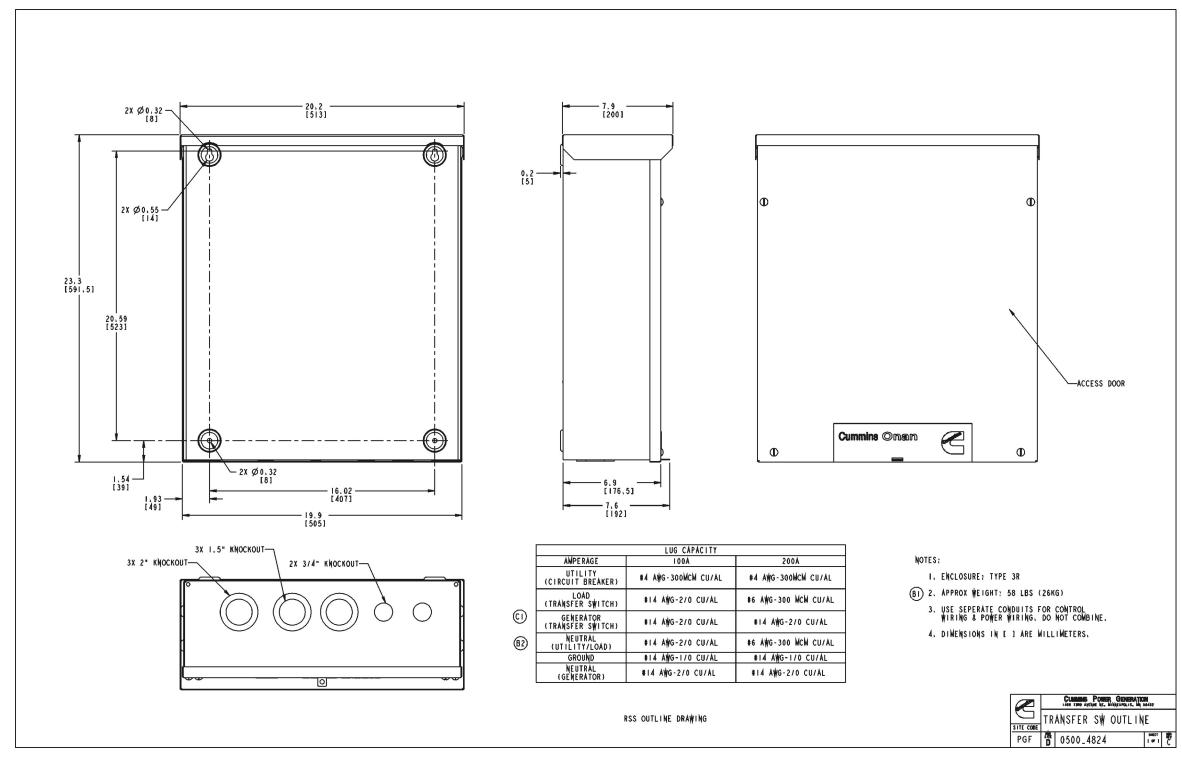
RSS100 AND RSS200 OUTLINE DRAWING - WITHOUT CONTROLLER
